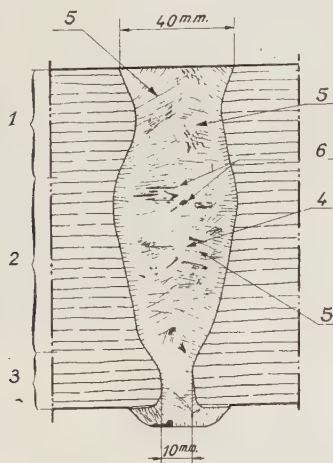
Vertical longitudinal diagrammatic section through a thermit-pressure welded joint. (An intentionally badly made weld to show the casting defects.)
